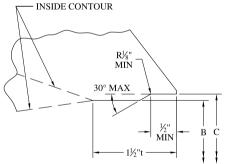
Welding End for Continous Rectangular Backing Ring (inside contour).
